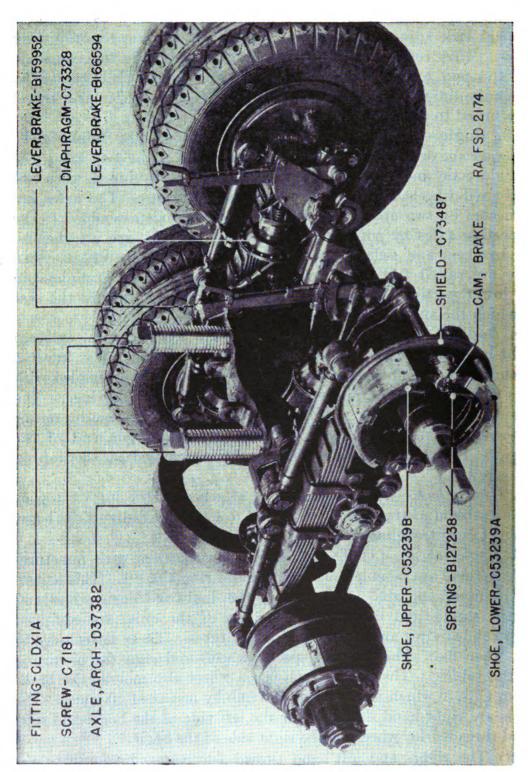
155-mm gun carriage bogie M1-rear view.
